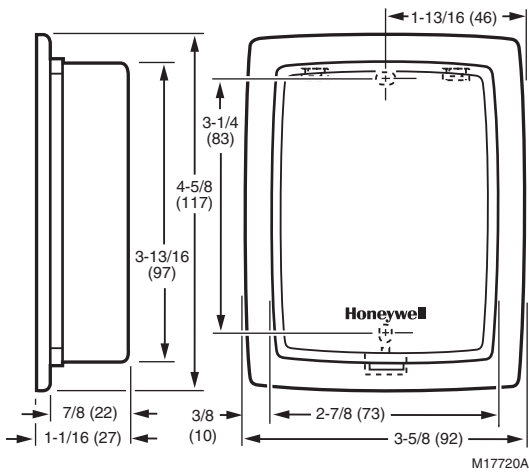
C7600B, H7665A Dimensions in In (mm).
